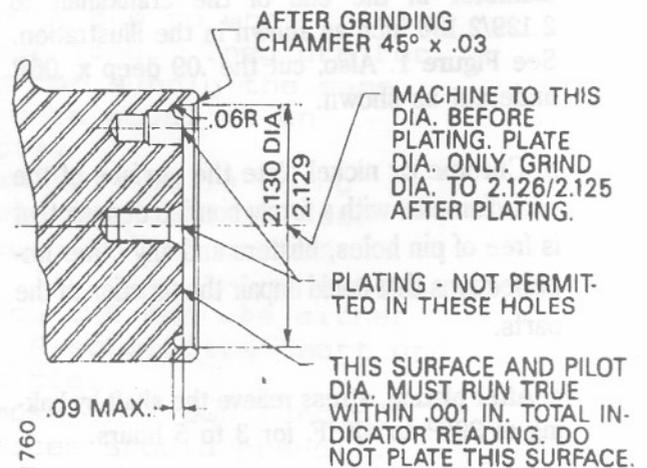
Details for Repairing Pilot Diameter of Crankshaft
